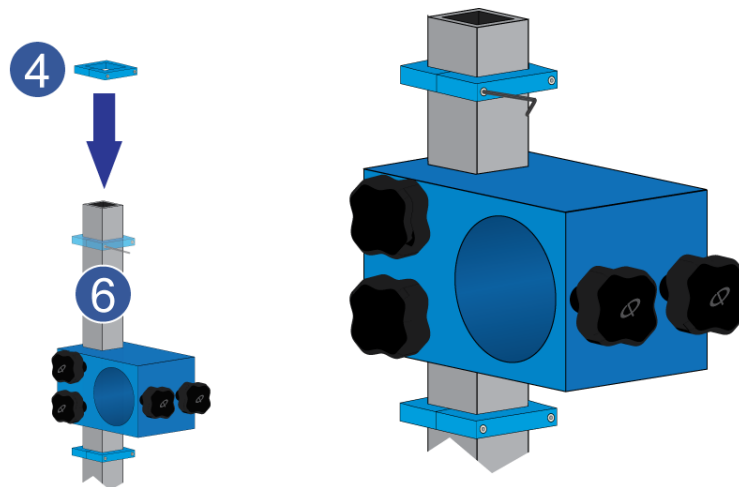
Assembly Instructions - Coil Mounting Structure - Step #2
